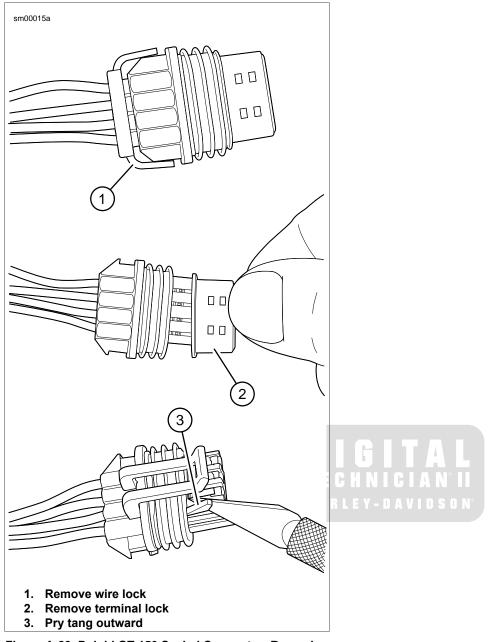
Delphi GT 150 Sealed Connector: Removing Socket Terminals
